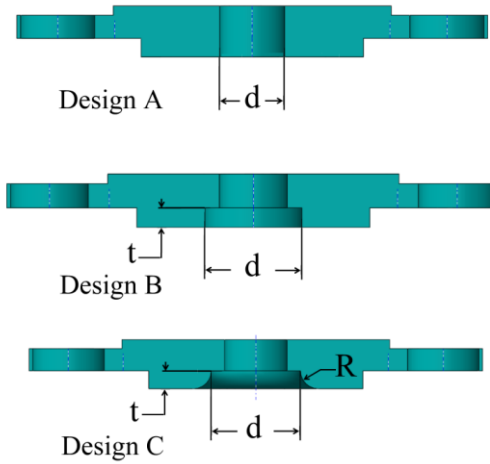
Blank holder designs utilized in die-less clinching experiments.
